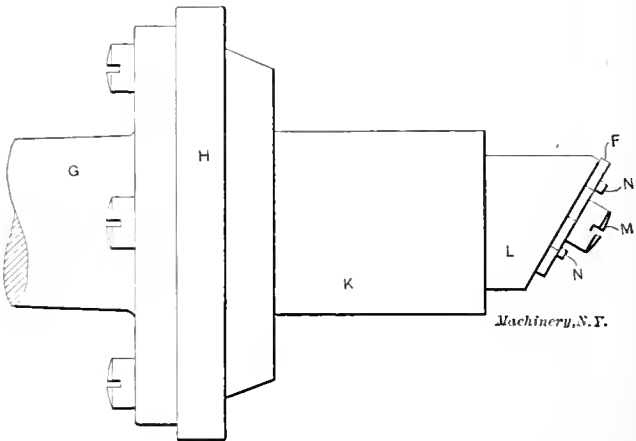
Chuck for Mounting the Pieces shown in Fig. 2.
